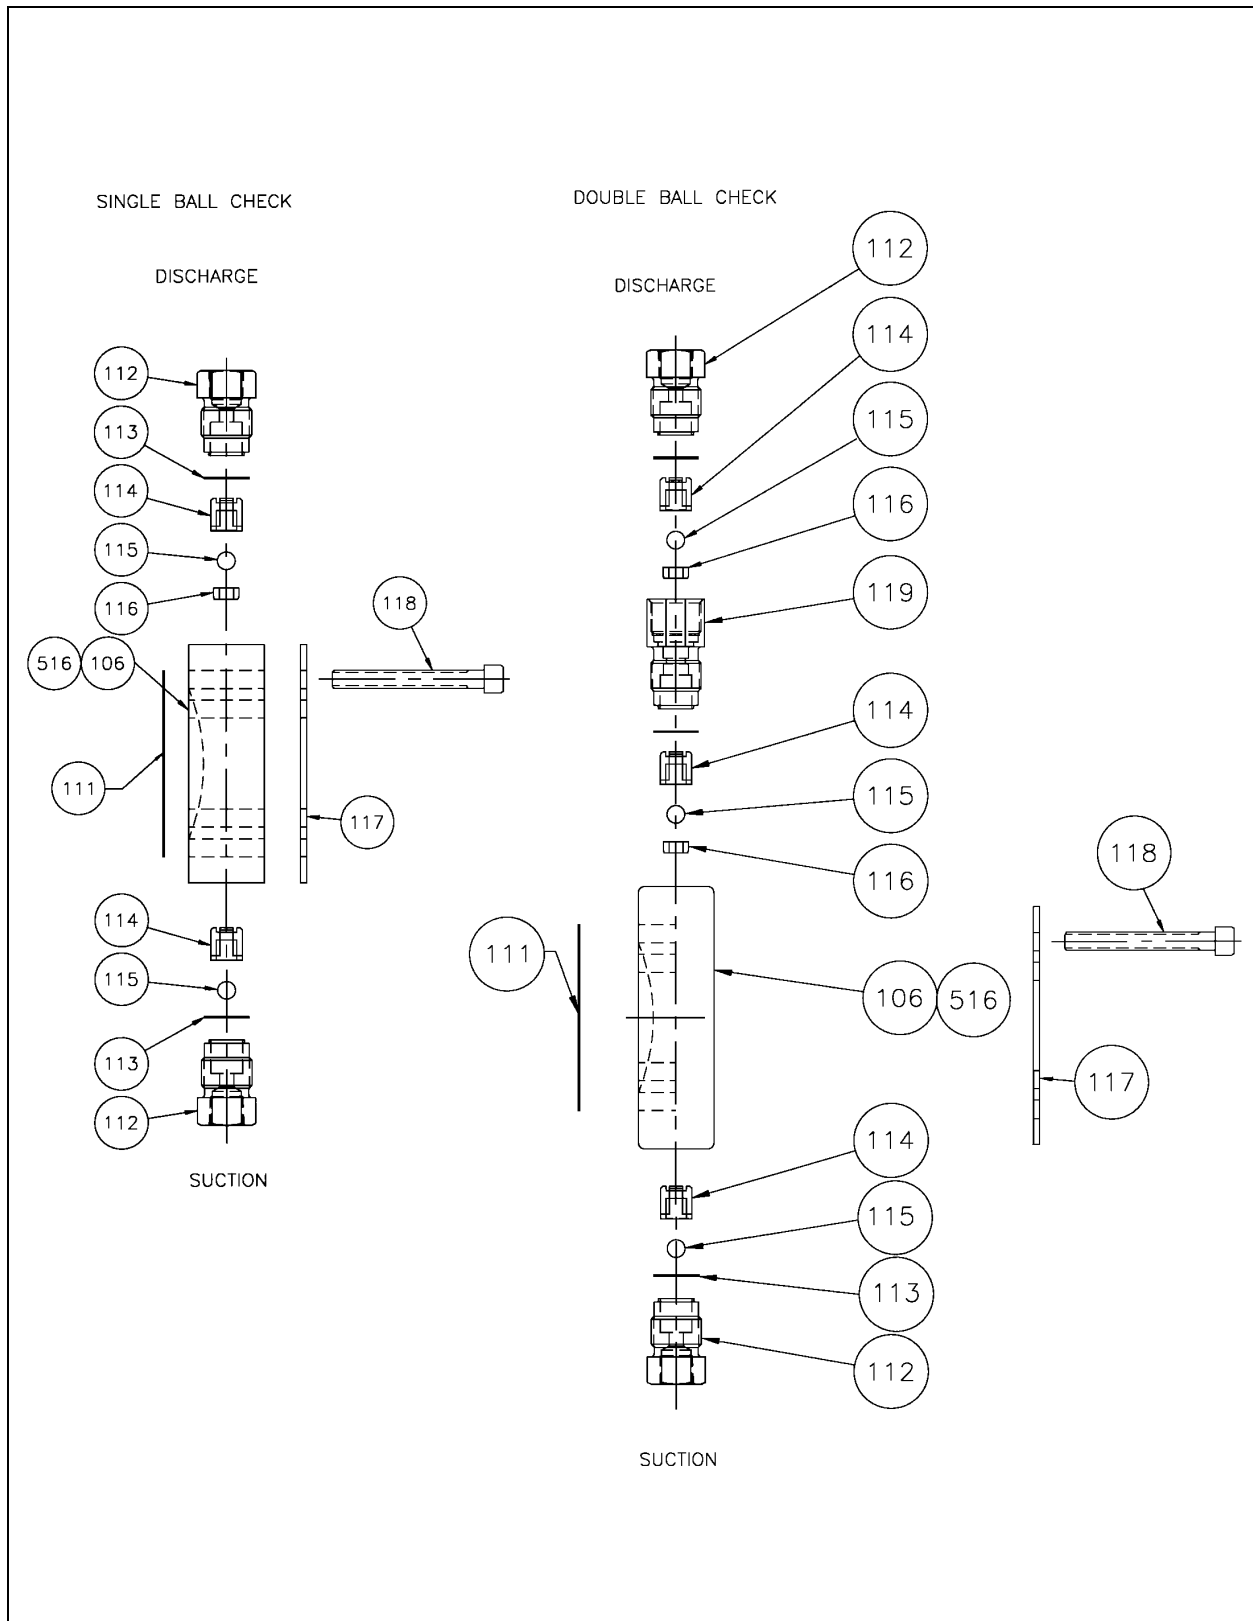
Liquid End Assembly, Size B, Non-Metallic.
